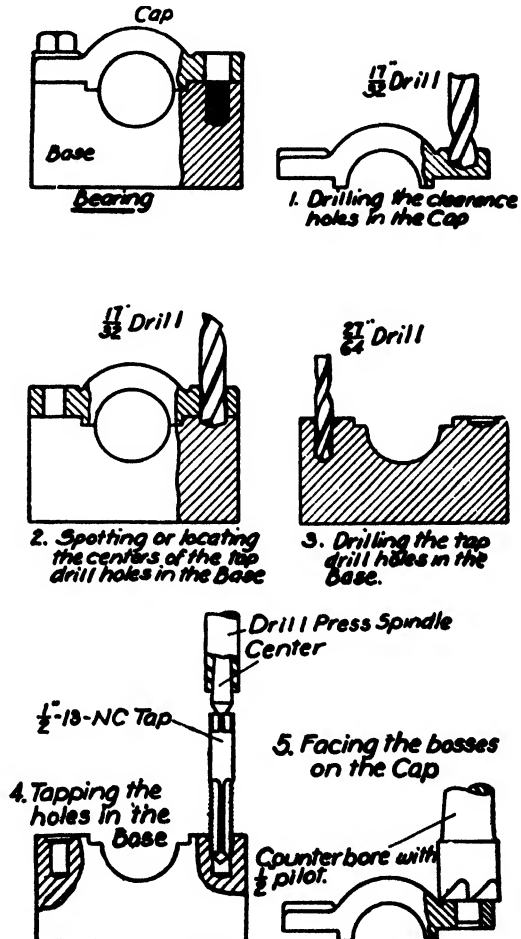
Stages in Drilling and Tapping the Cap Screw Holes in the Cap and Base of a Plain Bearing.
